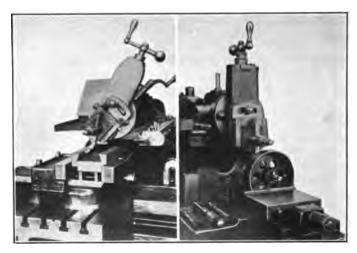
Planing a dove-tail slide bearing. Note the set over of the head and also of the apron.
